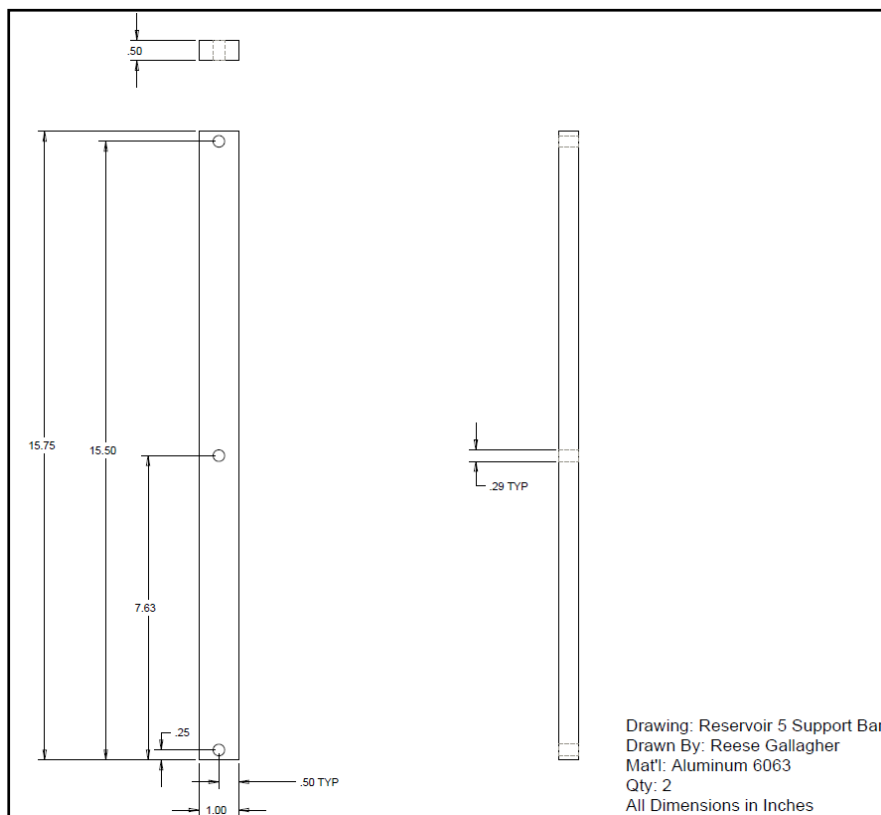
Reservoir 5 Support Bar Dimensional Drawing
